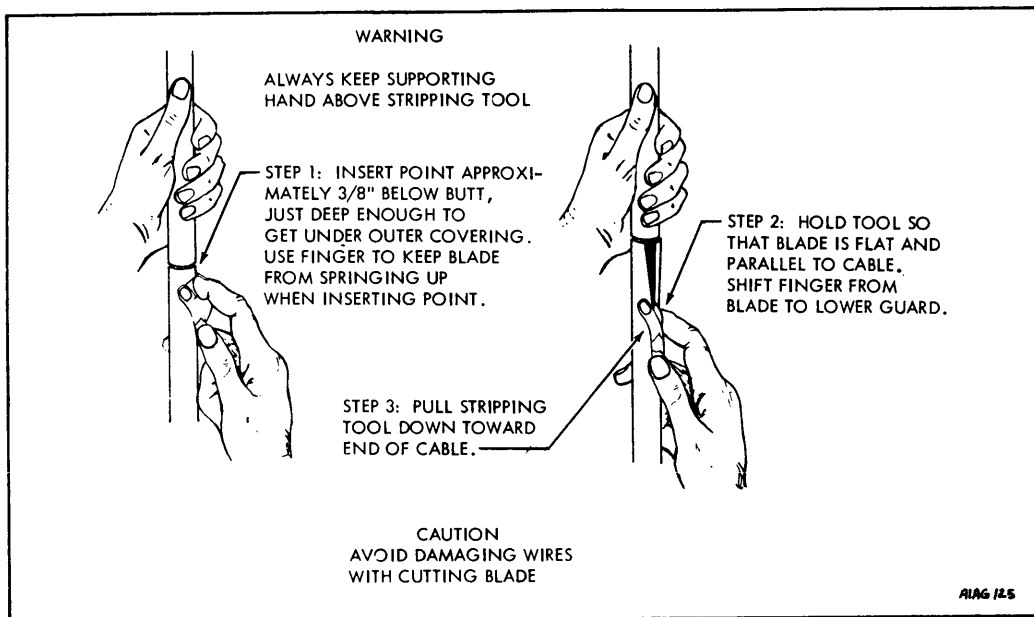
Use of W. E. Co. R2878 Cable Stripper
